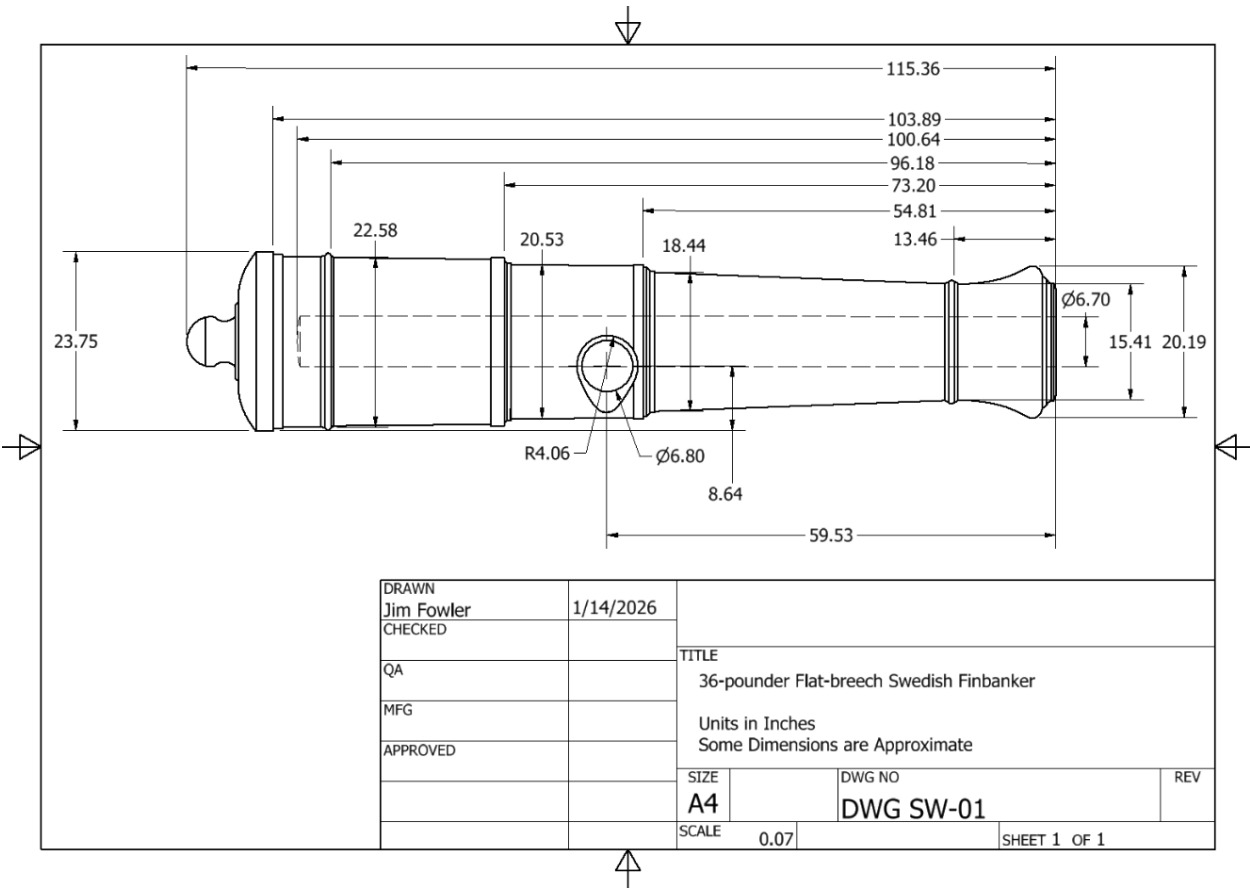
A dimensioned engineering drawing of the SW-01 CAD model. (Created by James Fowler in Autodesk Inventor.)
